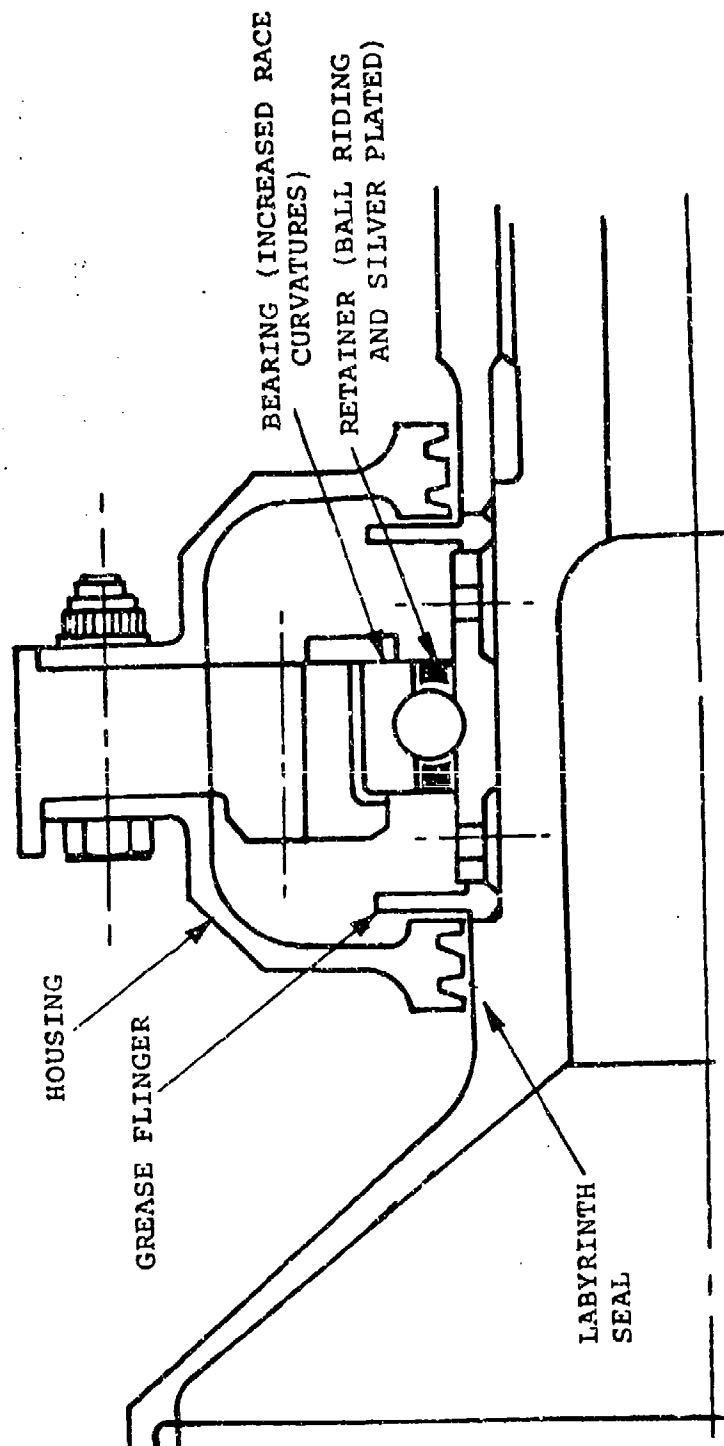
Final HLH/ATC Engine Shaft Support Bearing Configuration.
